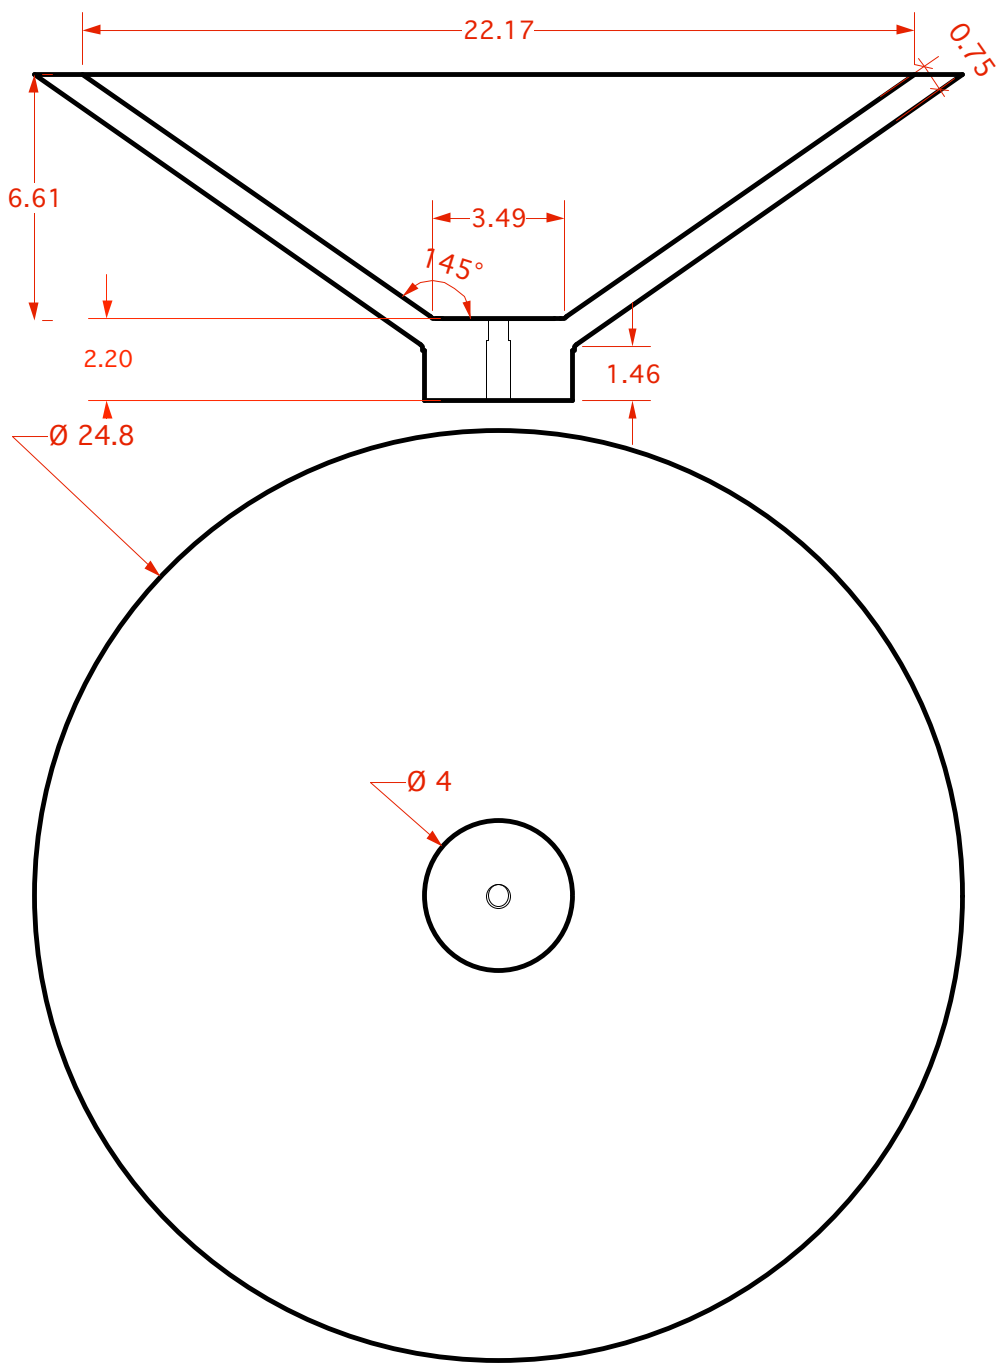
Engineering schematics for the acrylic shield used for stereoscopic imaging targets. Dimensions are shown in mm.
